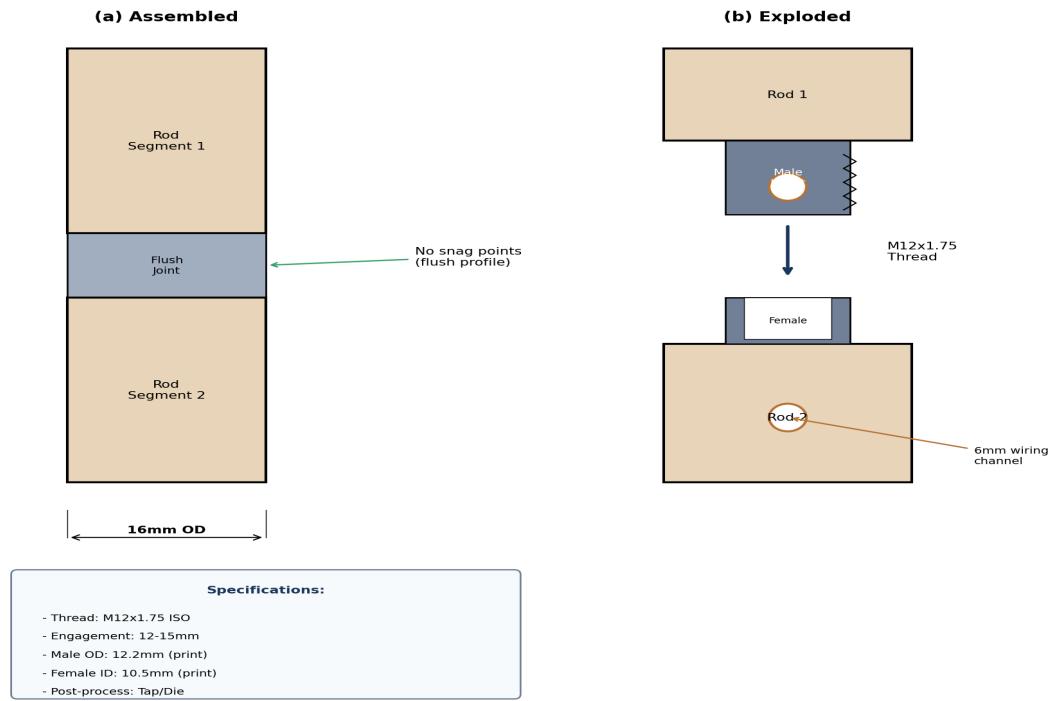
Modular flush-mount connector system showing (a) assembled view with smooth profile and (b) exploded view revealing male/female insert architecture. The 6mm central channel accommodates wiring. M12x1.75 threads provide robust mechanical connection.
